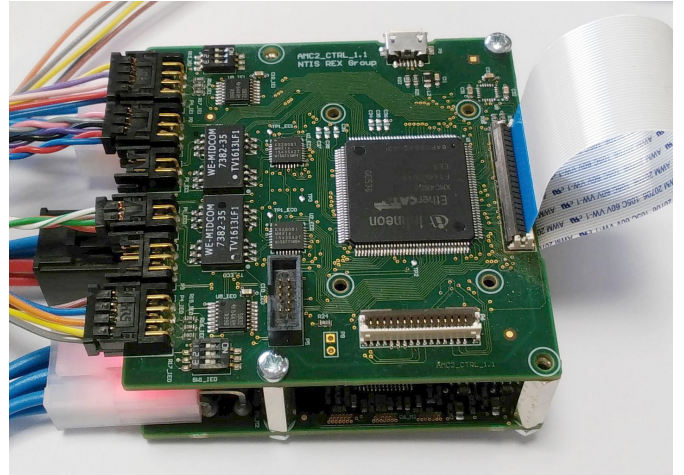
Motor controller prototype, overall dimensions 65×65×25 mm.
